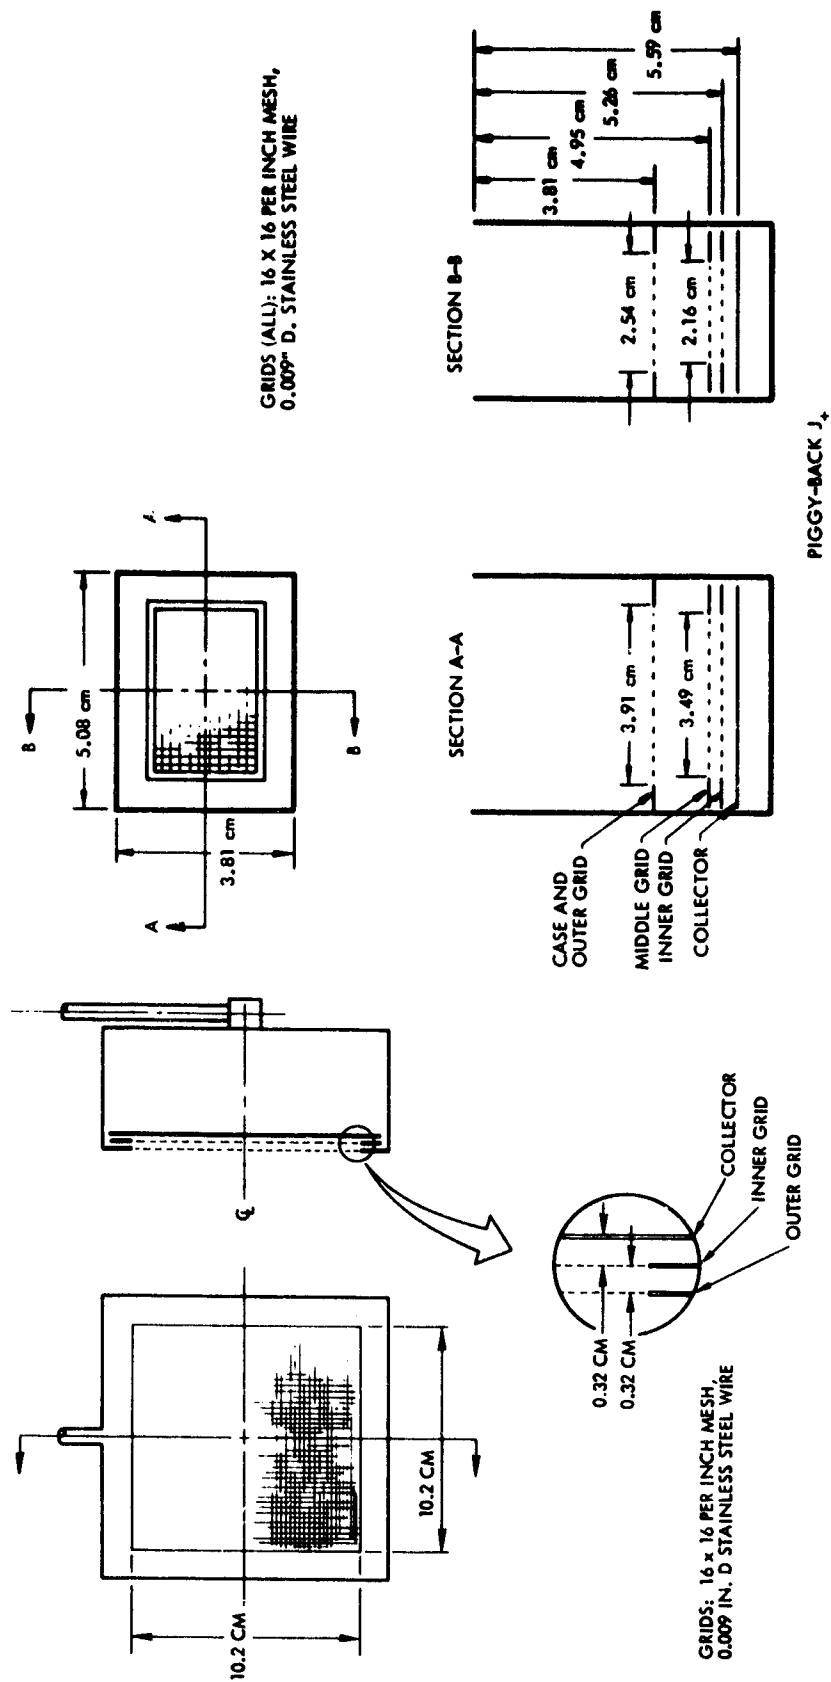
4-Inch J₊ and Piggyback Probe Dimensions (Continued)
